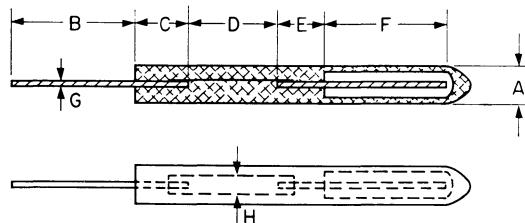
Dimensions of molybdenum seals (Table 4.1)
